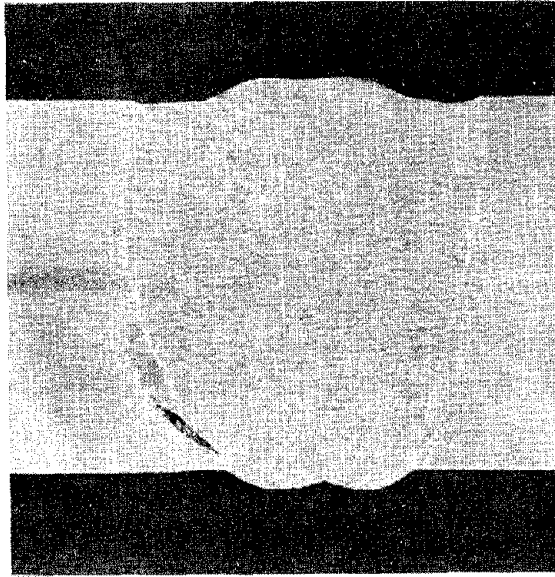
Lack of symmetry in a weld caused by positioning the guide tube nearer one plate surface resulting in a slag inclusion and minor underfill.
